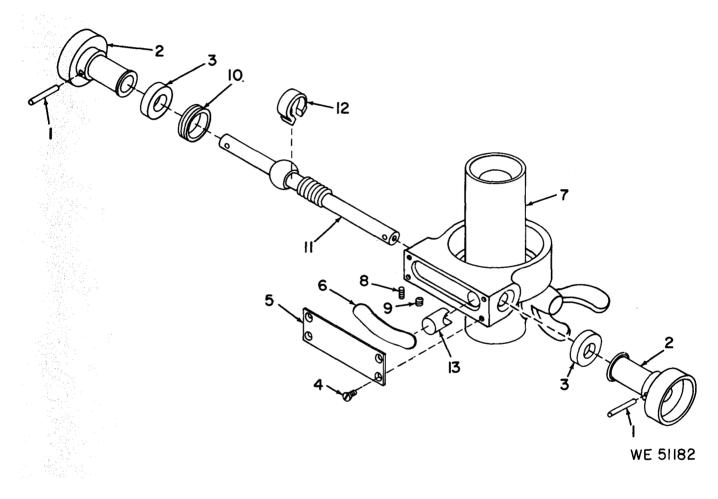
Orienting mechanism and housing assembly—partial exploded view.
